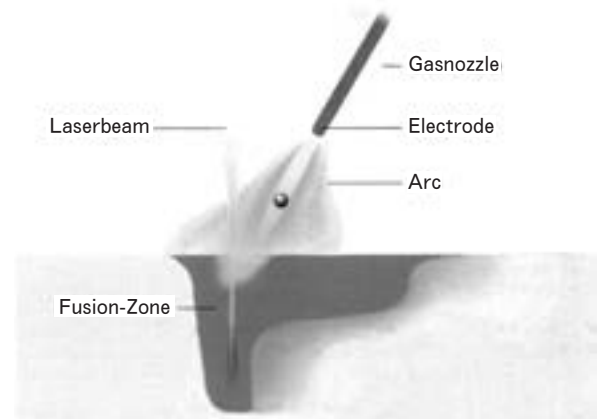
Schematic representation : LaserHybrid welding.
